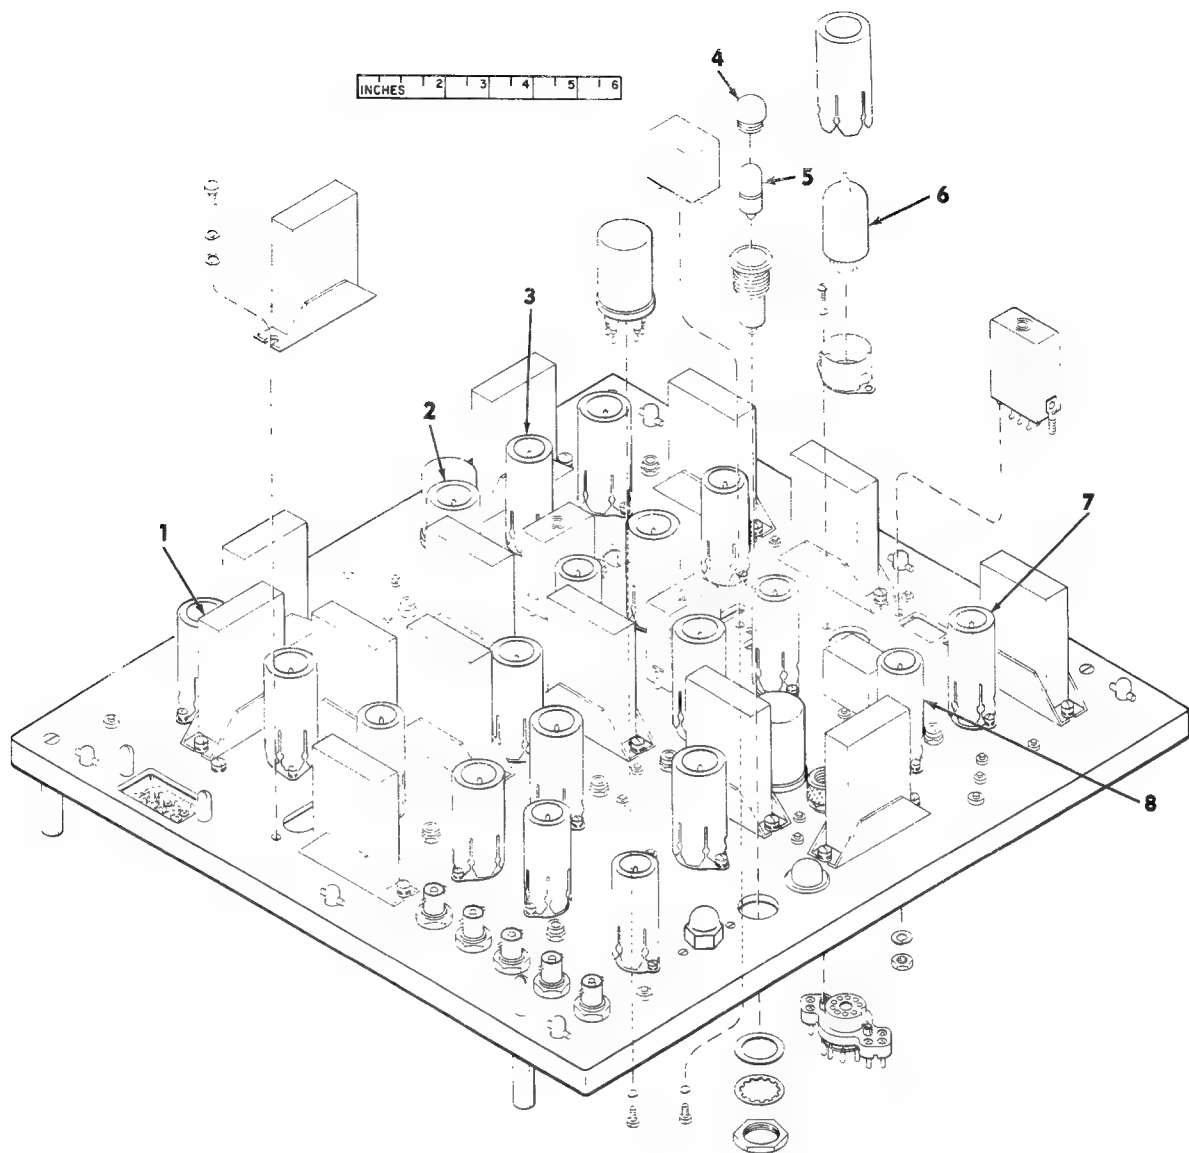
Coder, radar, guided missile (8159349)—partial exploded view
